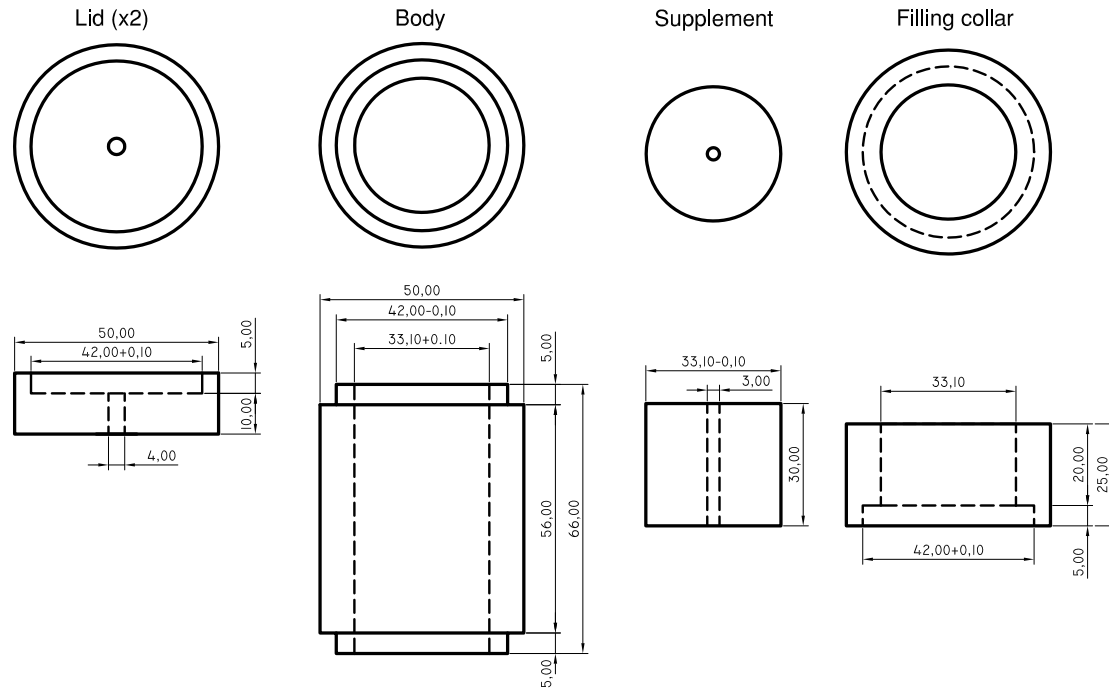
Dimensions (in mm) of PVC moulds and accessory pieces used for elaborating specimens for interfacial expansion tests.
